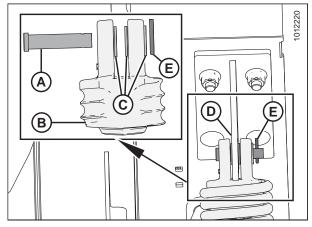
Left Side Spring Float Assembly Shown – Right Side Opposite
